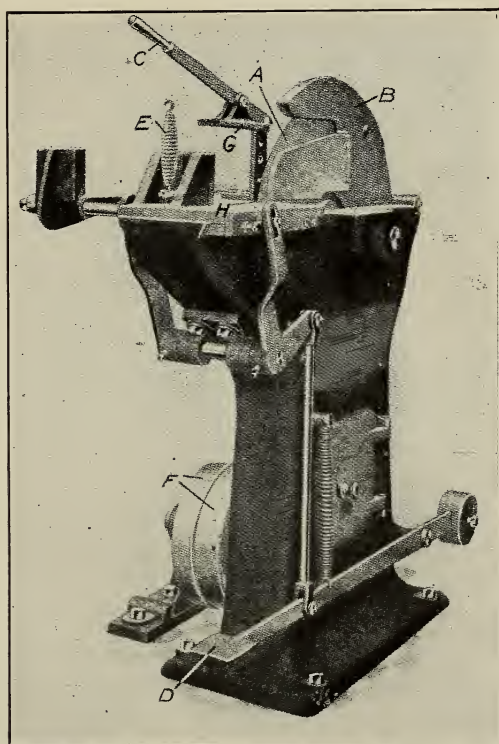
POWER KNIFE FOR CUTTING RUBBER.
